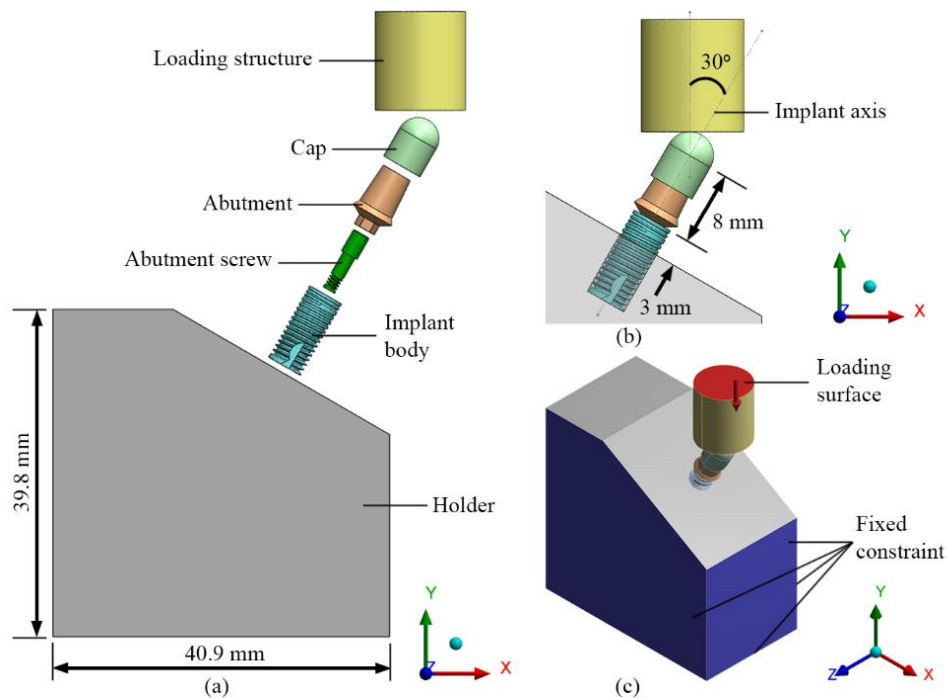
(a) Exploded view of the model. (b) Dimensions for the implant placement. (c) Loading and support locations of the model.
